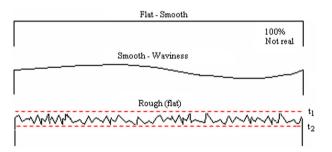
Surfaces of GB measuring faces are commonly a combination of tolerance limit.
